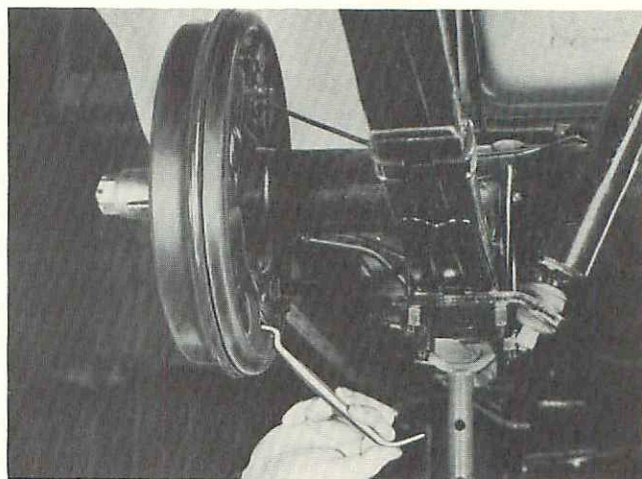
Adjusting the Brakes by Turning the Star Wheel
